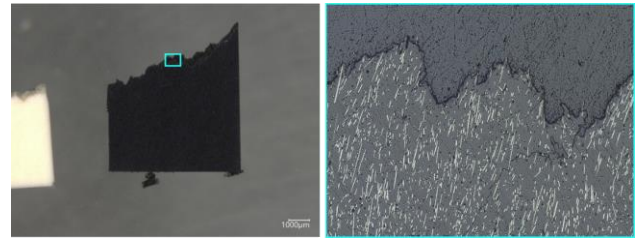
Carbon fiber-filled PEEK specimen after tensile testing and prepared as a cross section (left); higher magnification image of the fracture surface of the PEEK material indicating the filler materials and fracture path (right).
